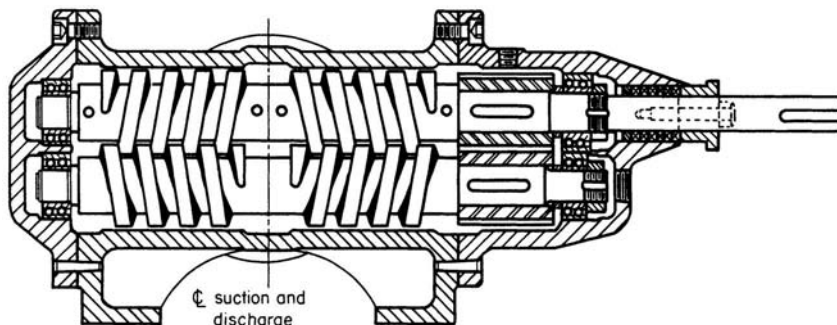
Two-rotor screw pump. (Courtesy of Warren Quimby Pump Co.)
